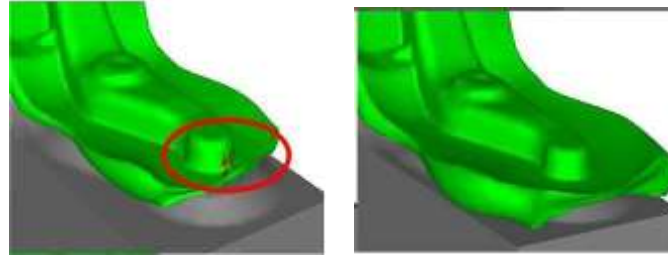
Defects in lever forging: lap in lever foot
